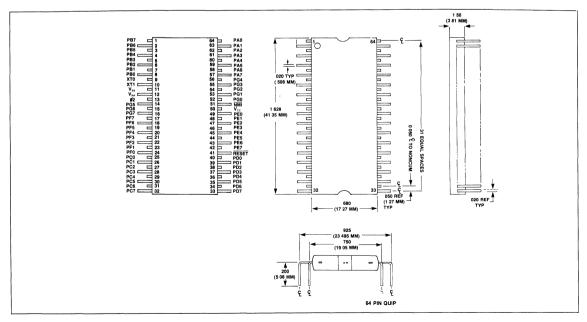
R6500/12 or /16 Mechanical Outline and Pin Out Configuration
